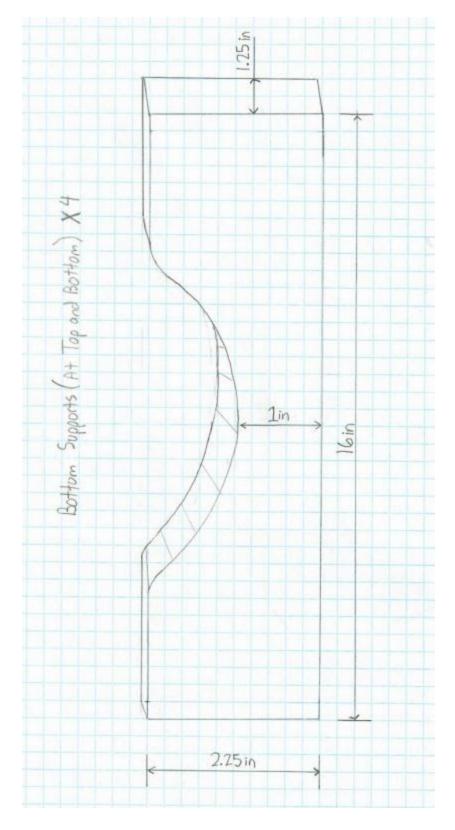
The sketch and dimensions of the supports at the top and bottom of the ramp.
